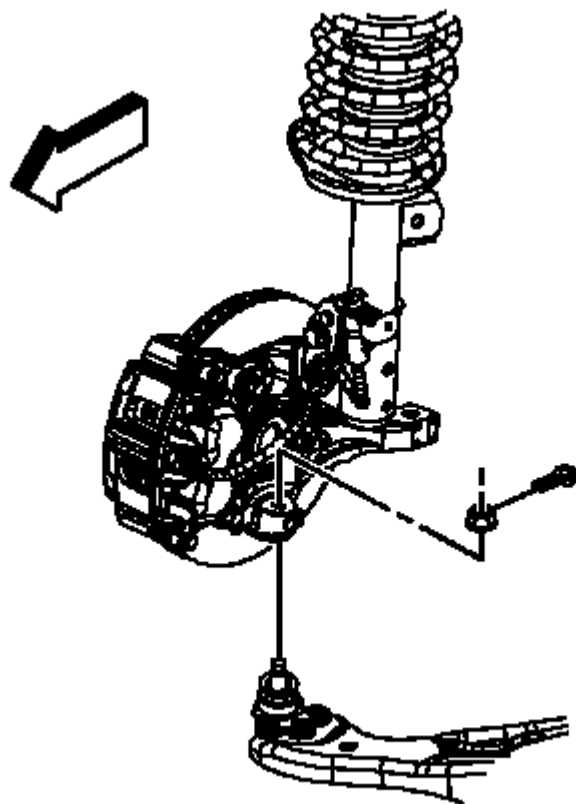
View Of Lower Ball Joint At Steering Knuckle
